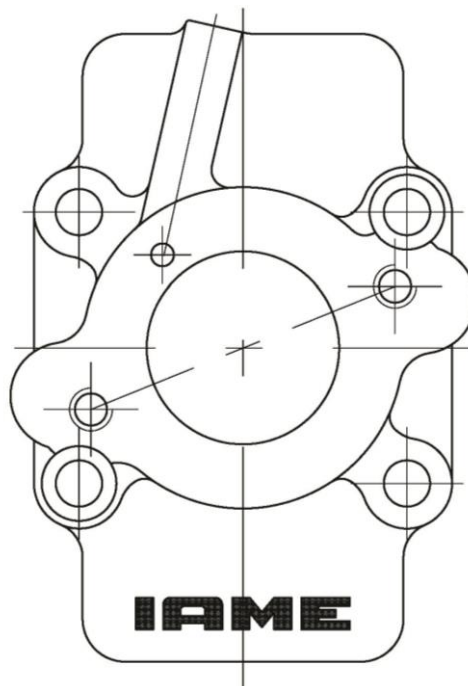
PHOTO IDENTIFICATION CARBURETTOR INLET CONVEYOR
